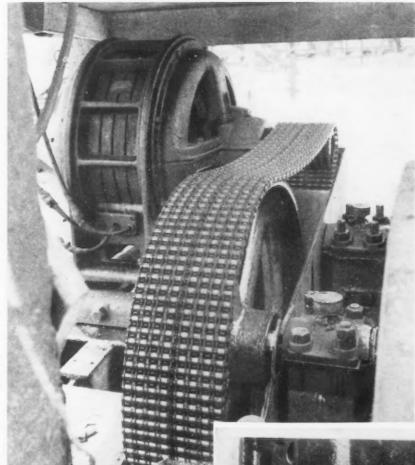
Chain Belt Co. doublequadruple strand roller chain drive, upper cover of casing removed, on an open-air oil field
